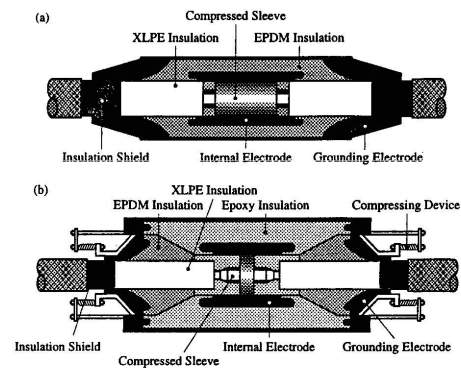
Type of joints: (a) Premolded-type and (b) Prefabricated-type
